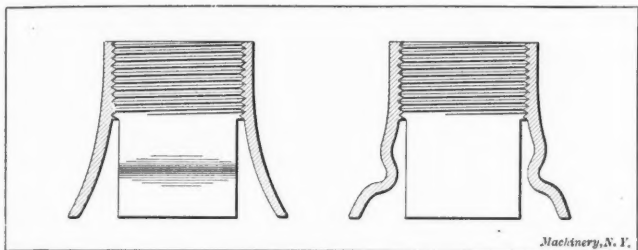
Special Sleeve for Gripping the End of the Broken Rod
